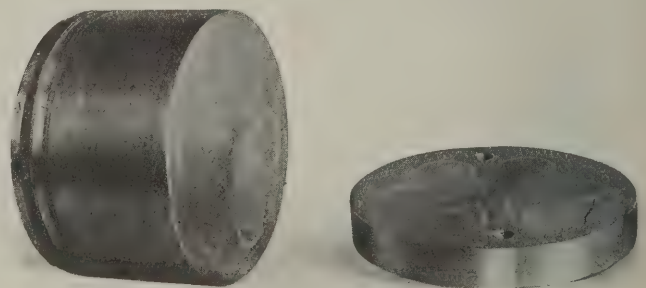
Rotary Magnetic Chuck and Auxiliary Plate
